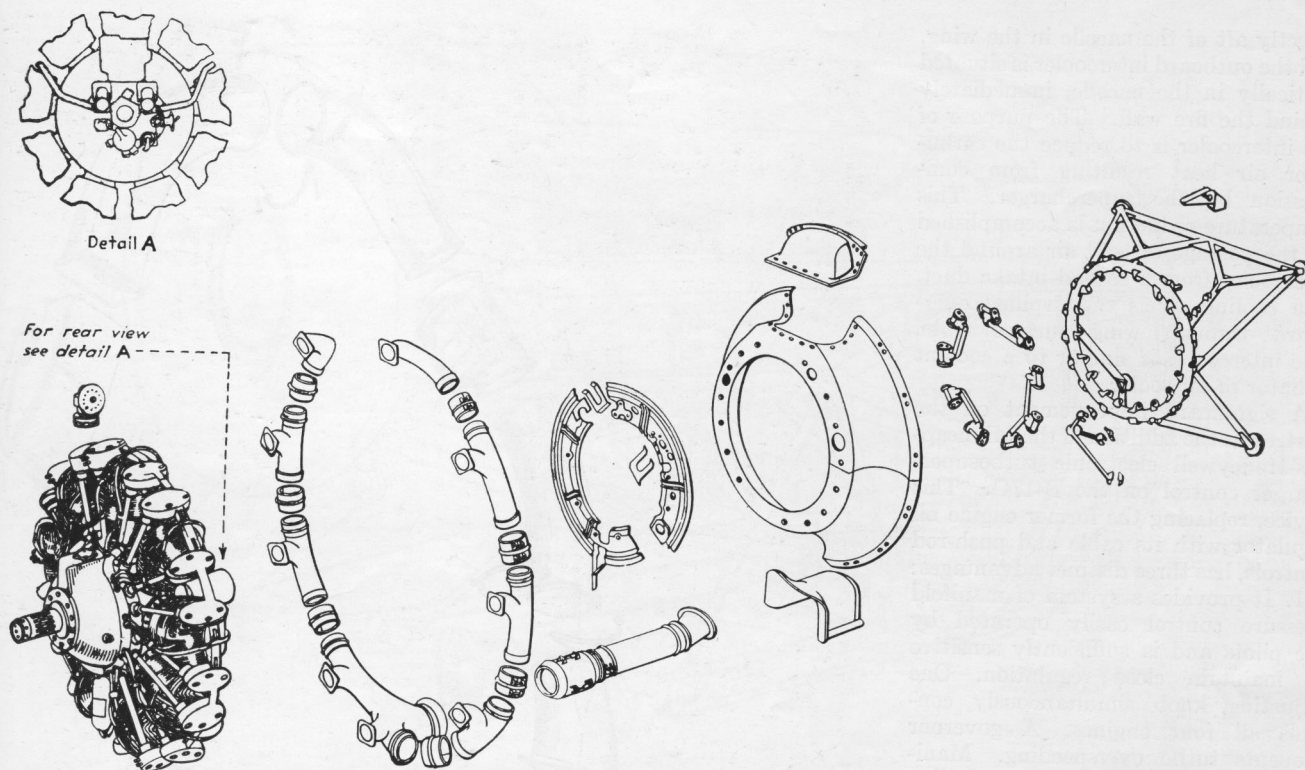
Details of the engine installation include exhaust collector-ring assembly, cabin heat tail-pipe section with flexible joint at the left end, and dynamic suspensions (left of the engine mount).
